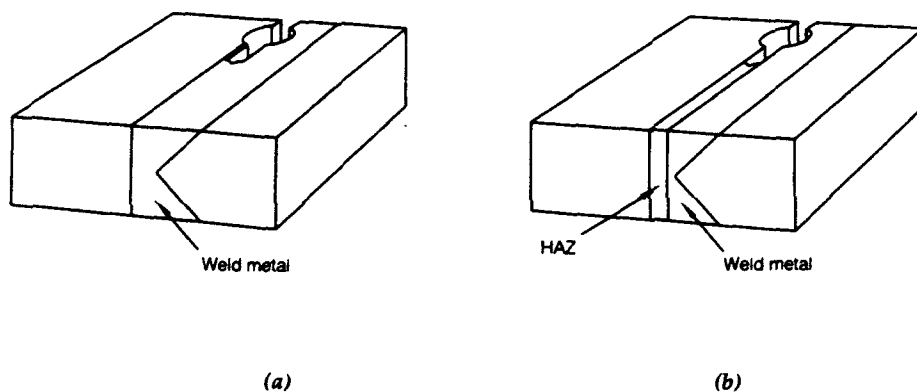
Positioning of K_{Ia} specimen notch with respect to (a) weld metal and (b) heat affected zone.
